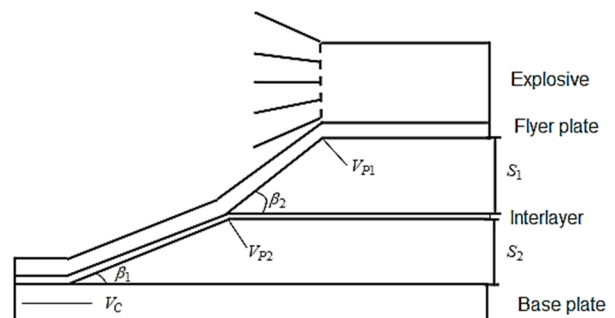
Geometrical configuration of a three-layer explosion welding.
